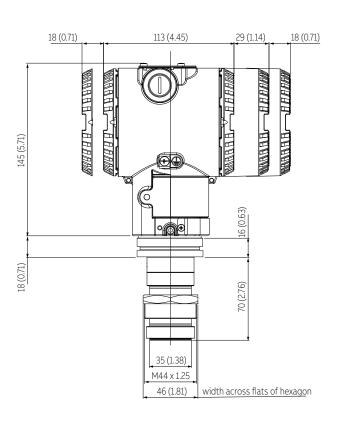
$\,\,$ 266HRH / 266NRH with barrel housing and direct mount seal S26KN pulp and paper to threaded spud
